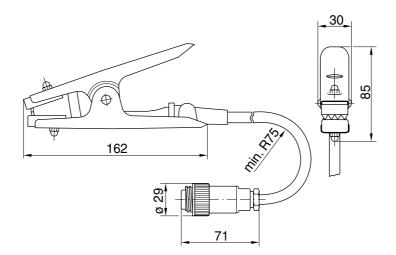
Type 70AK; maximum clamp opening 35 mm
